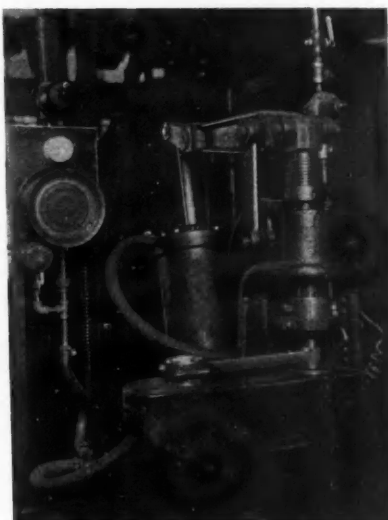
Full automatic device which fits and inspects fit of pin bushing
